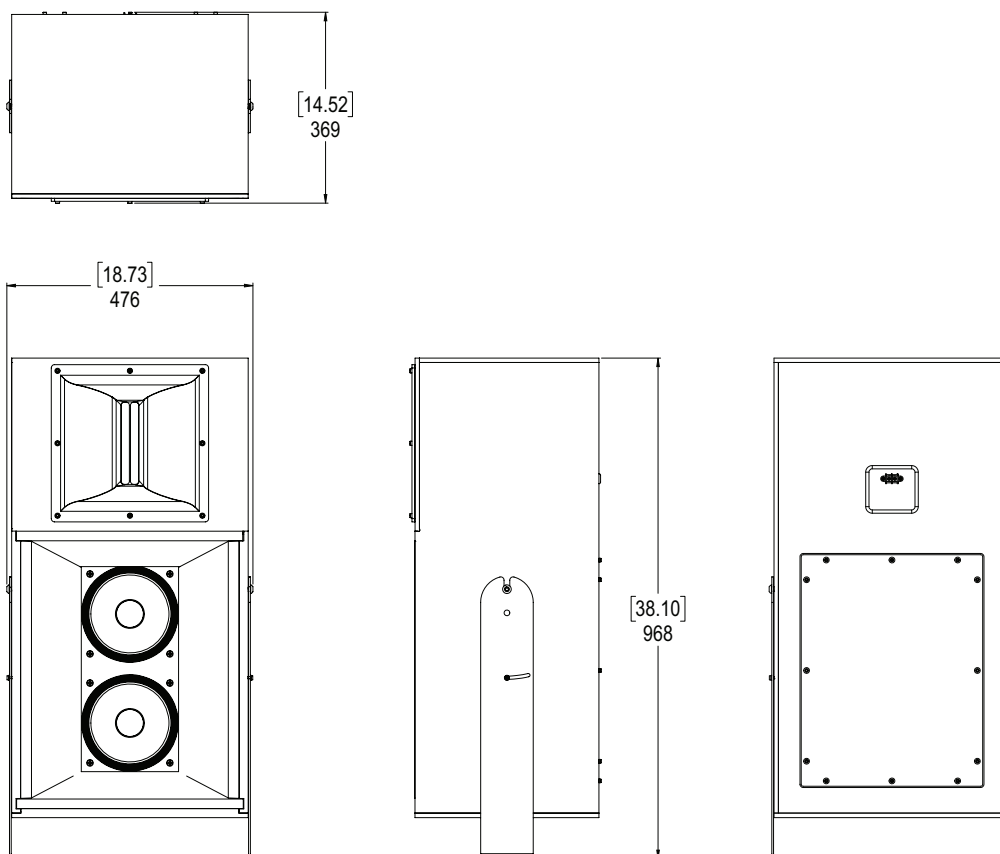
CS301MH Dimensions in [Inches] Millimeters
